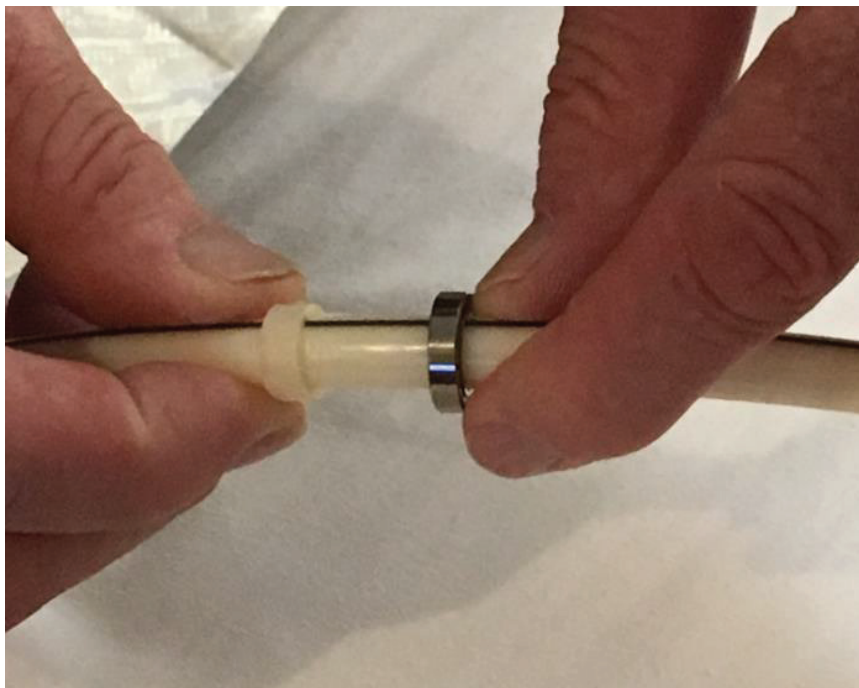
Use one hand to hold the drive tube and the other to slide the bearing
